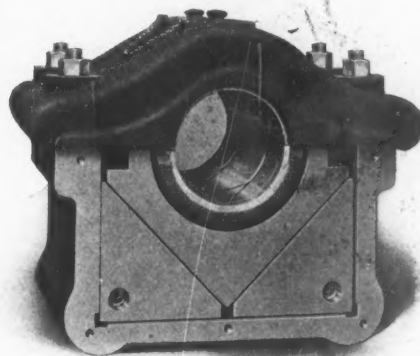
Adjustable Wedge Block Bearing for High-pressure Blower
